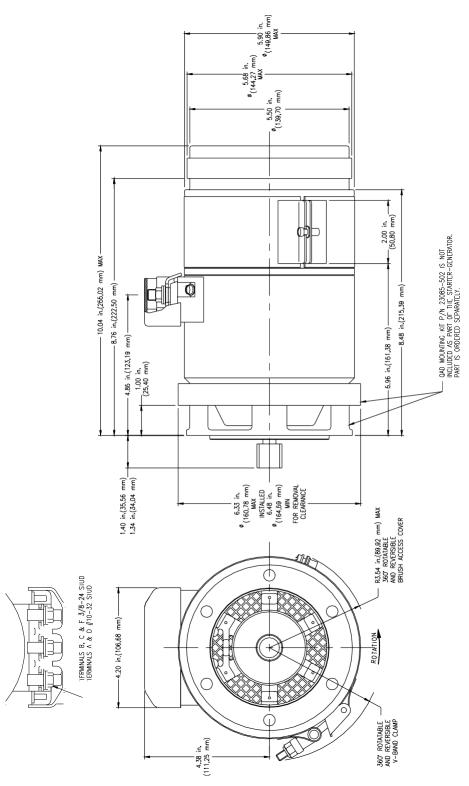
Outline Drawing of 23069-015 (Sheet 1 of 2)
